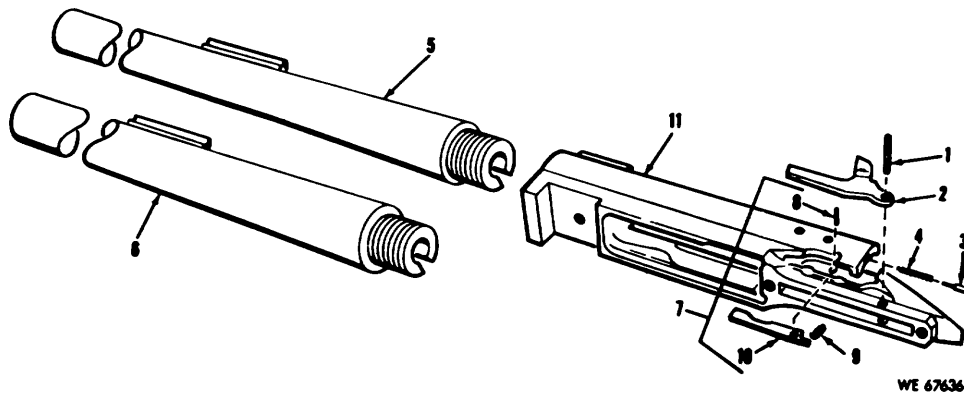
Major assemblies and groups, Caliber .30 Winchester Rifle, Model 70, chambered for 30-06 and .300H and H Magnum (Match Grade) - exploded view.
